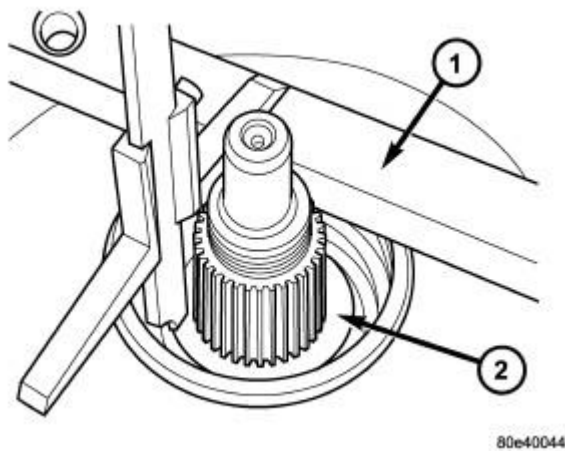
Measuring From Transmission Housing -To- Park Gear
